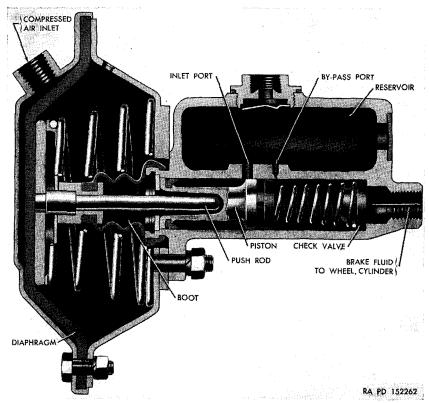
Cutaway of brake air chamber and hydraulic master cylinder.
